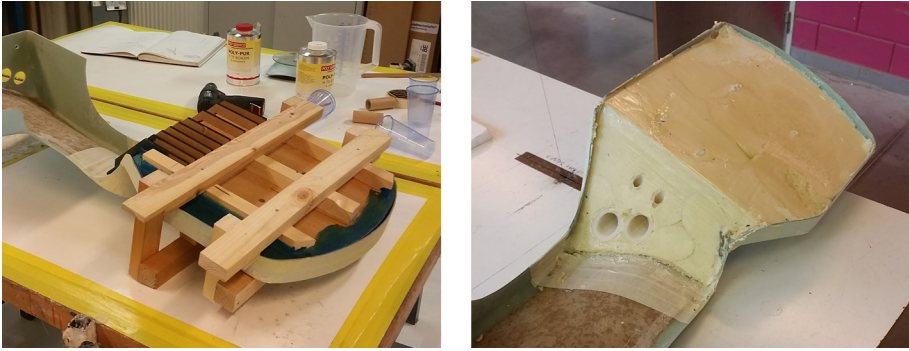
Left: Partial mould installed on BC2.5. Right: Demoulded PU hard foam core with 3D printed tube fixation insert.
